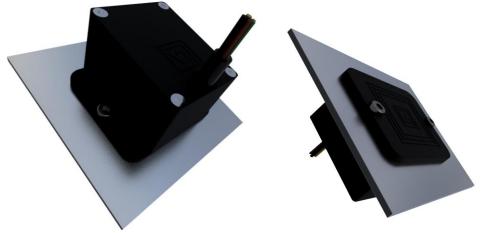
Installation representation a) on the surface b) recessed into the hole
